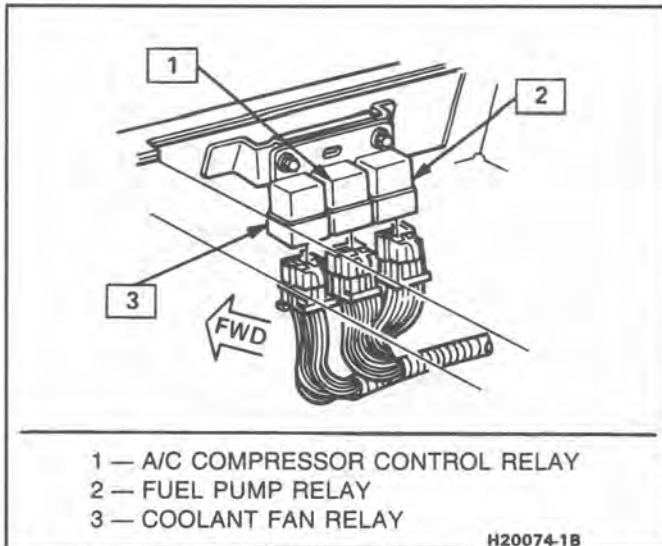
Compressor and Fuel Pump Relays - VIN Code R
